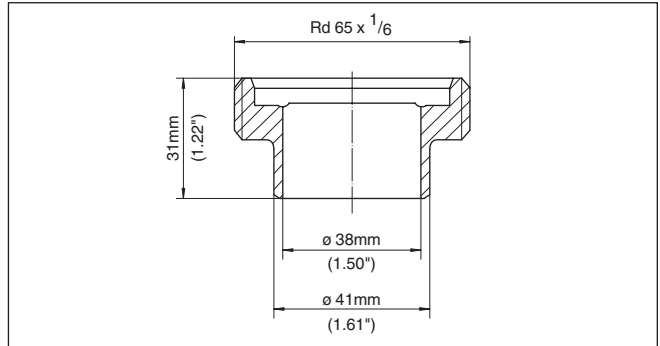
Dimensions of welded socket, slotted nut DN 40 (DIN 11864-1)
